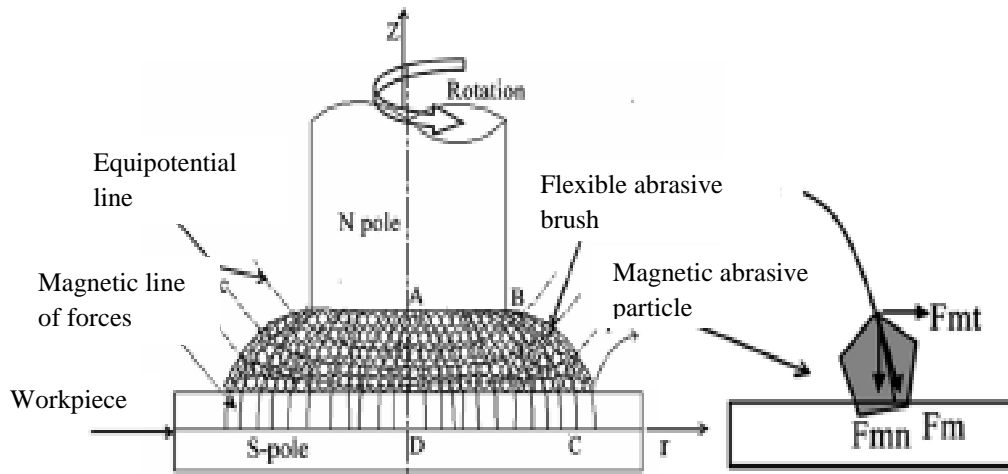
Enlarged view of the machining zone, workpiece and electromagnet [Jain, 2008]
